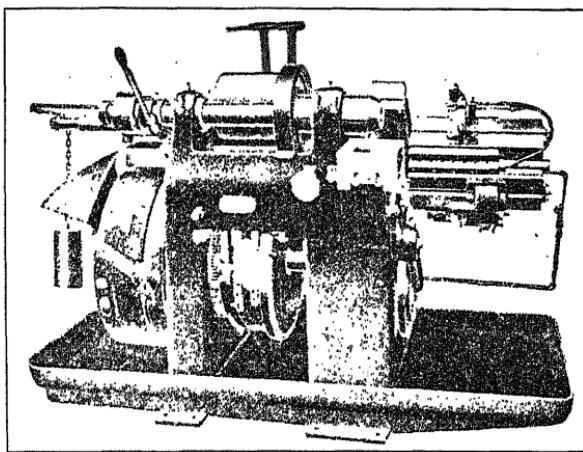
An automatic screw machine showing cams. National Acme Co., Cleveland.
